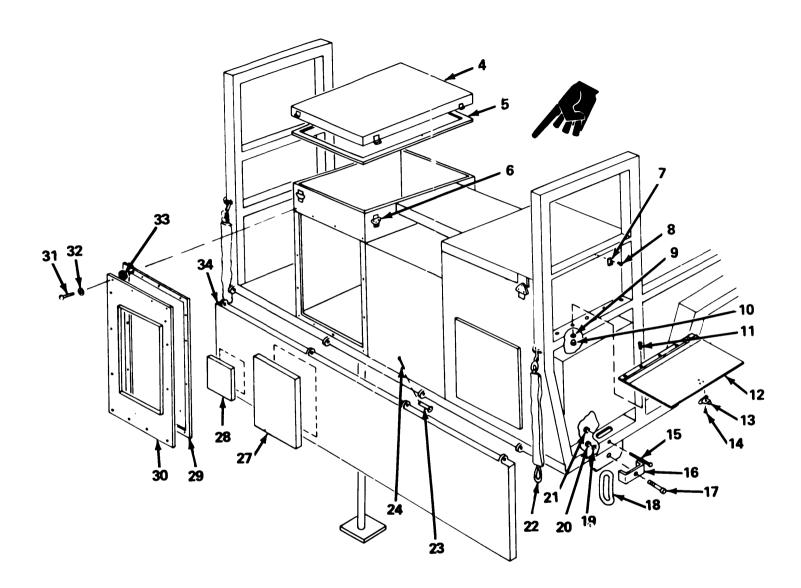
Environmental and miscellaneous equipment, exploded view.
